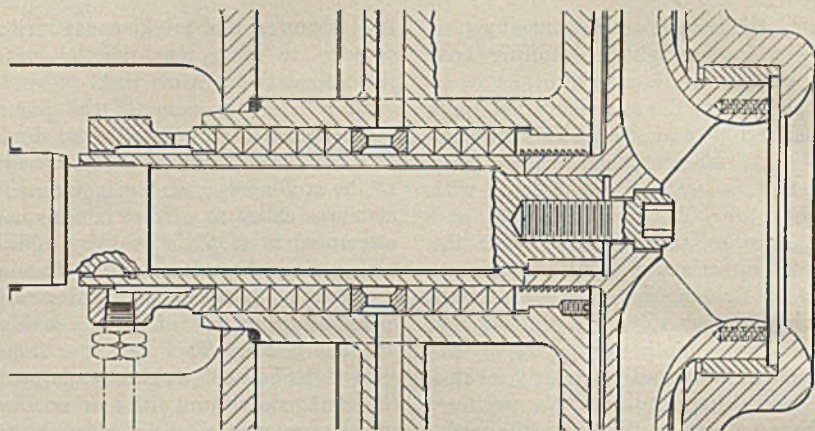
This unconfined shaft sleeve can expand without strain on the device holding the impeller in its fixed position on the shaft
